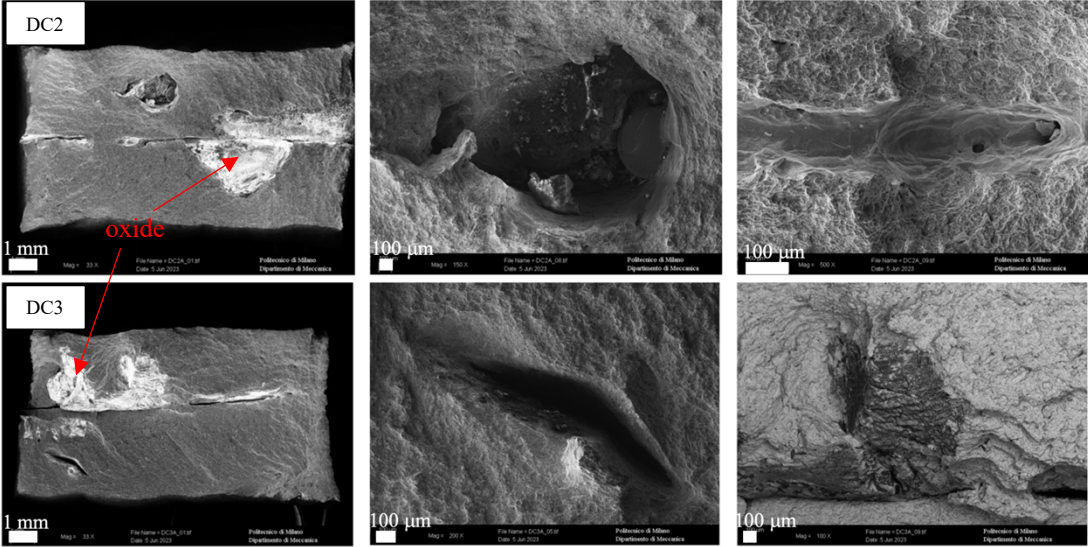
Fracture surfaces of the DC2 and DC3 butt weld specimens at the SEM
